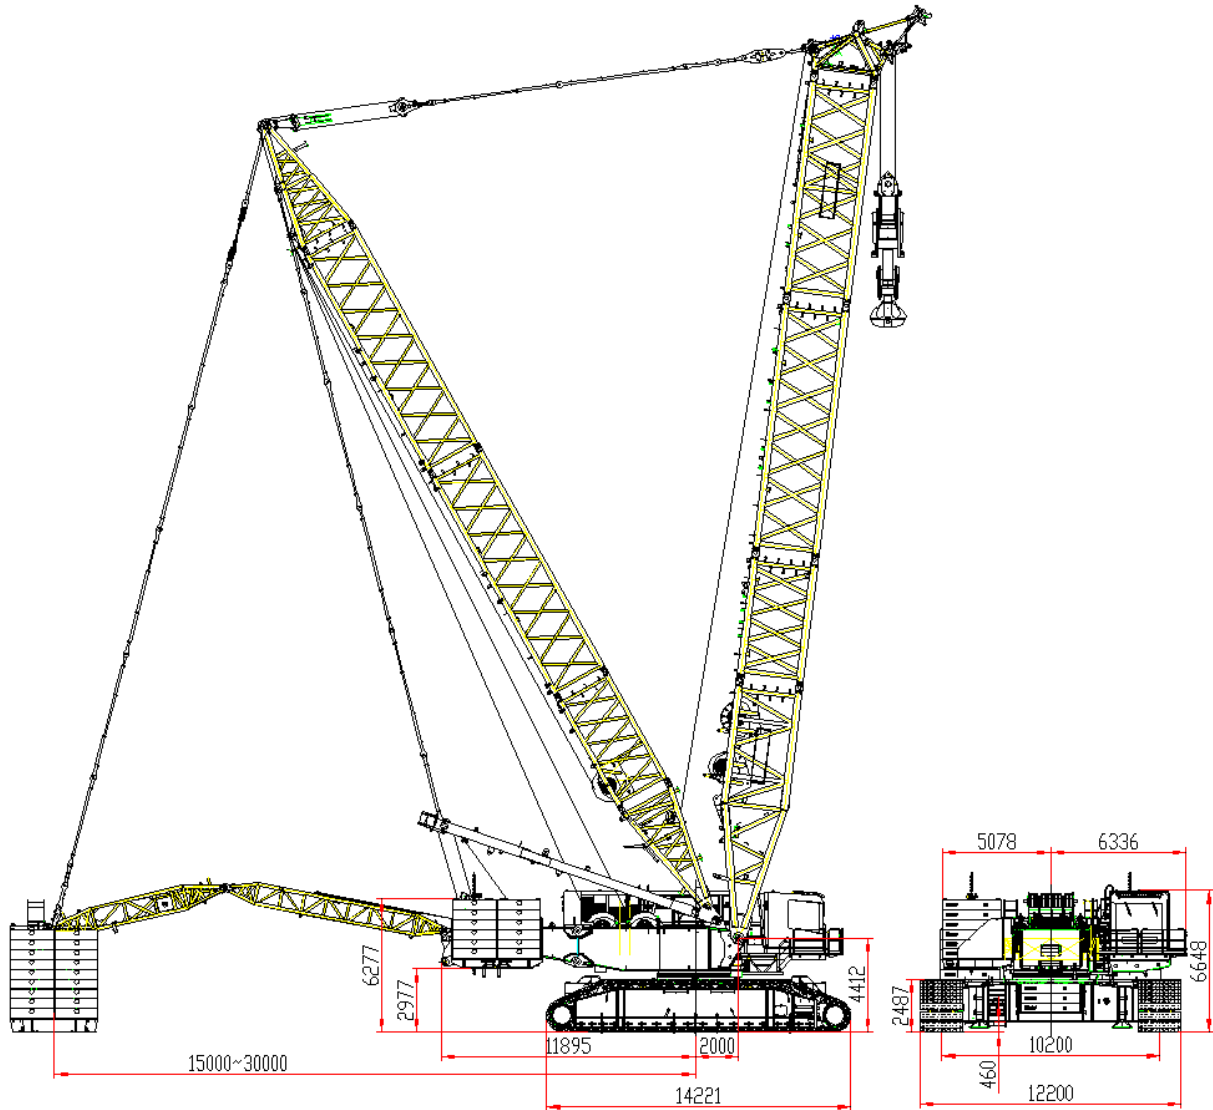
Outline drawing of XLC22000 crawler crane
